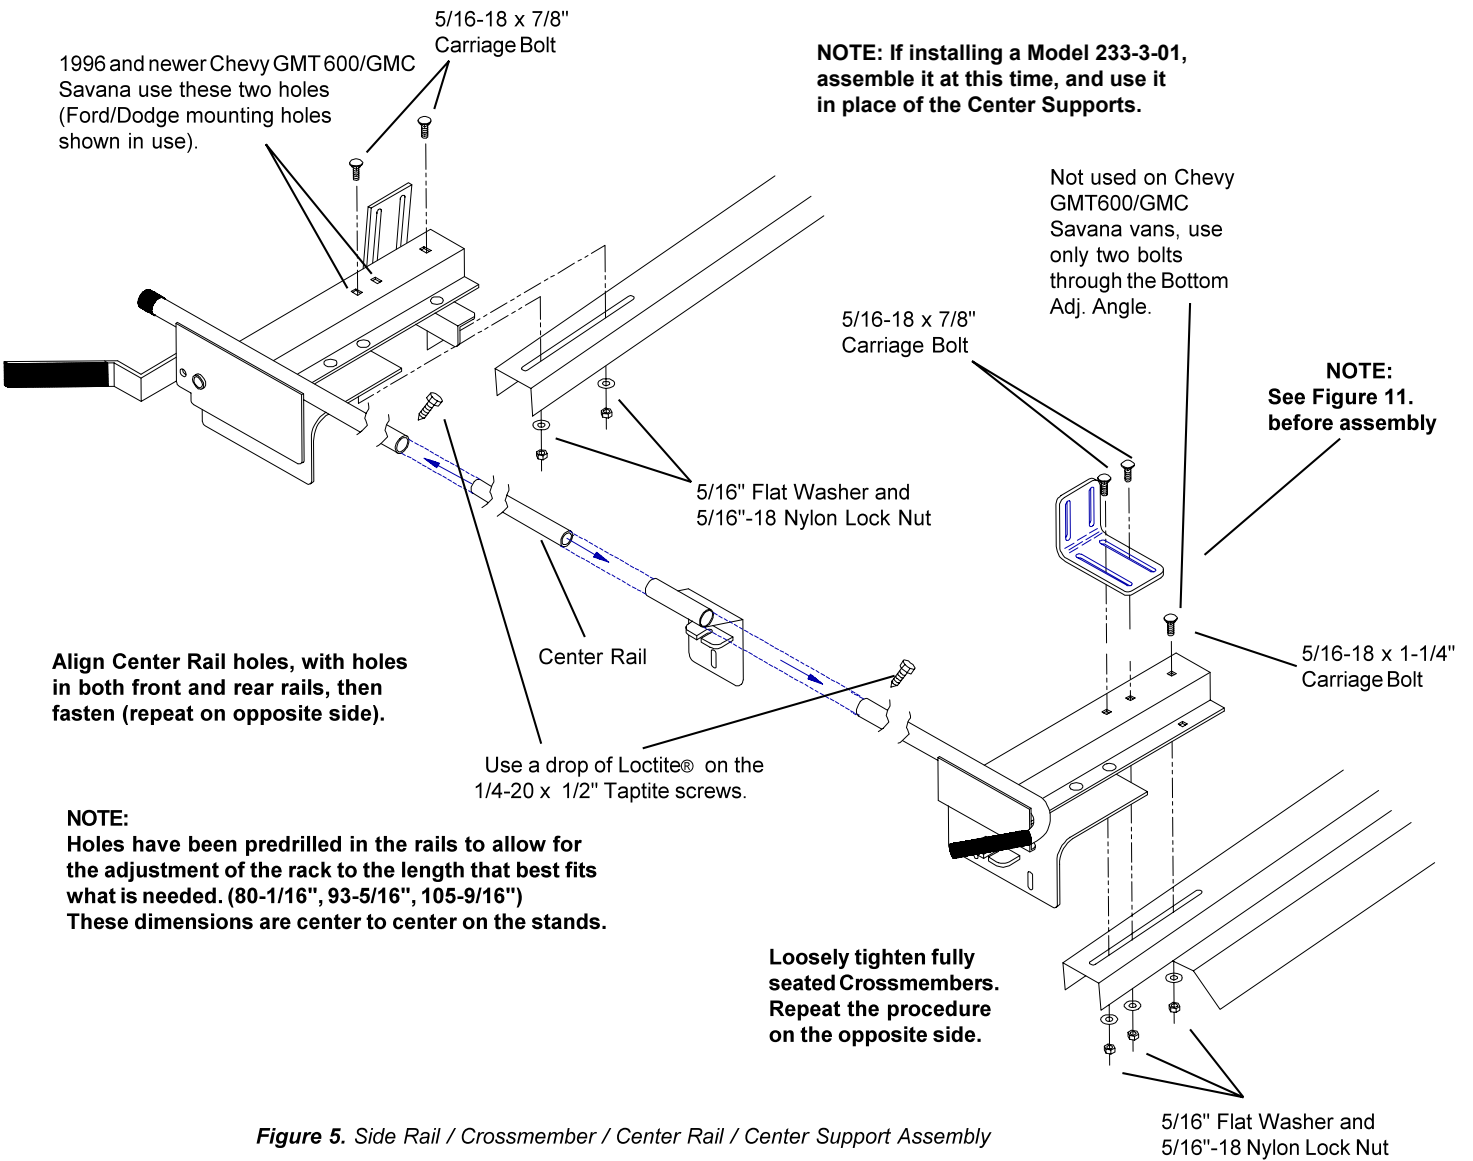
Side Rail / Crossmember / Center Rail / Center Support Assembly
